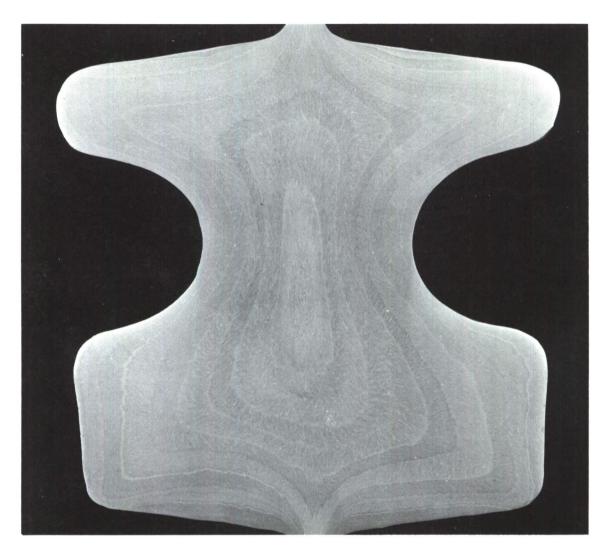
IMI 679 Transverse Section Through Forging Center Section (Approx. 1X)
